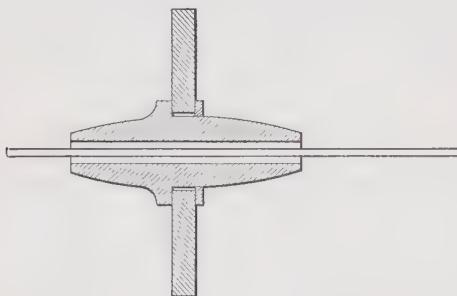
Type of bushing liable to cause brush discharge on surface of wire.
